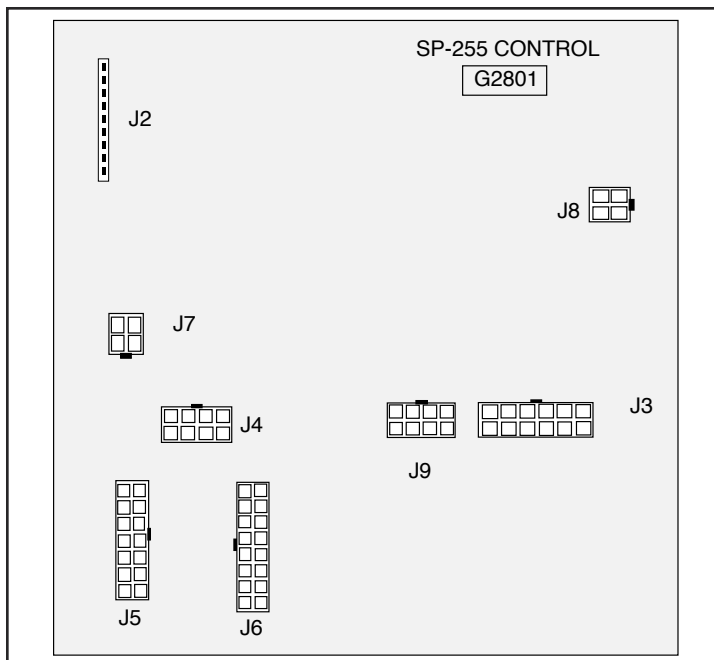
Wiring Harness and Molex Plug Locations.
